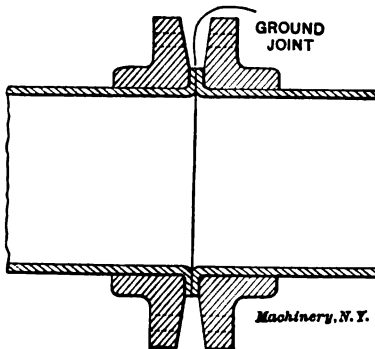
Pipe Joint with Flanges Shrunk on the Pipe
